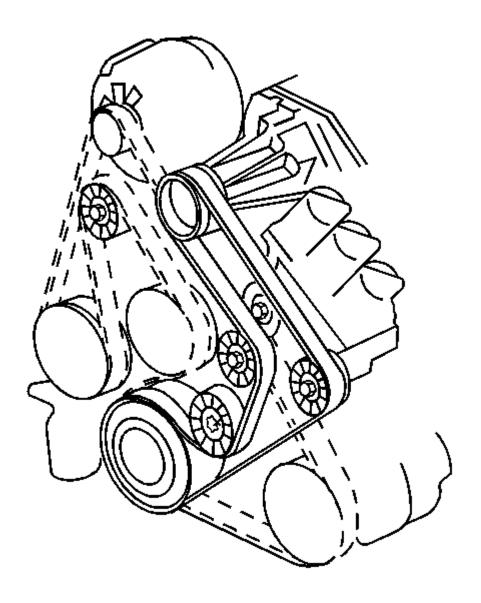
View Of Supercharger Drive Belt Courtesy of GENERAL MOTORS CORP.
